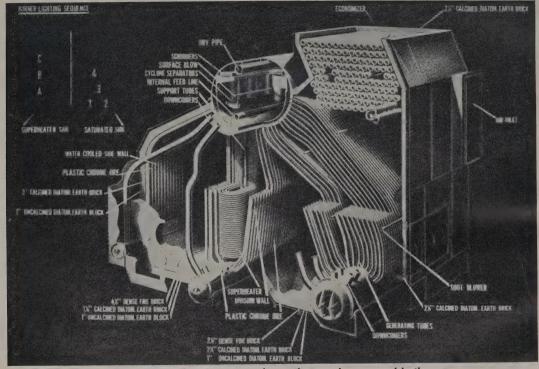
Two-furnace single-uptake superheat control boiler.
